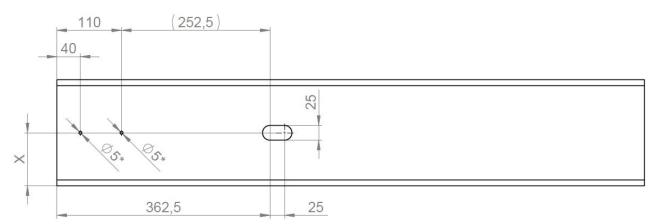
Drill hole positions for end feed with expansion unit and aluminium overrun cap
